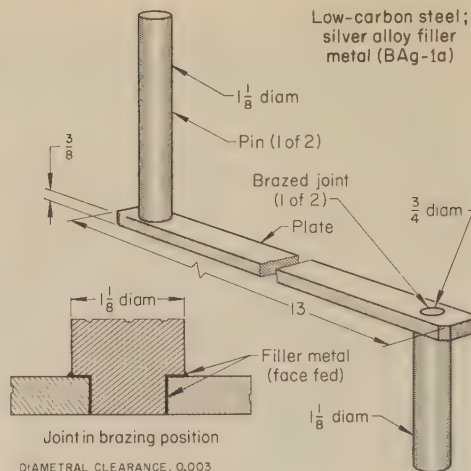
Pin-and-plate assembly for which torch brazing was preferred because no fixture was needed (Example 574)
